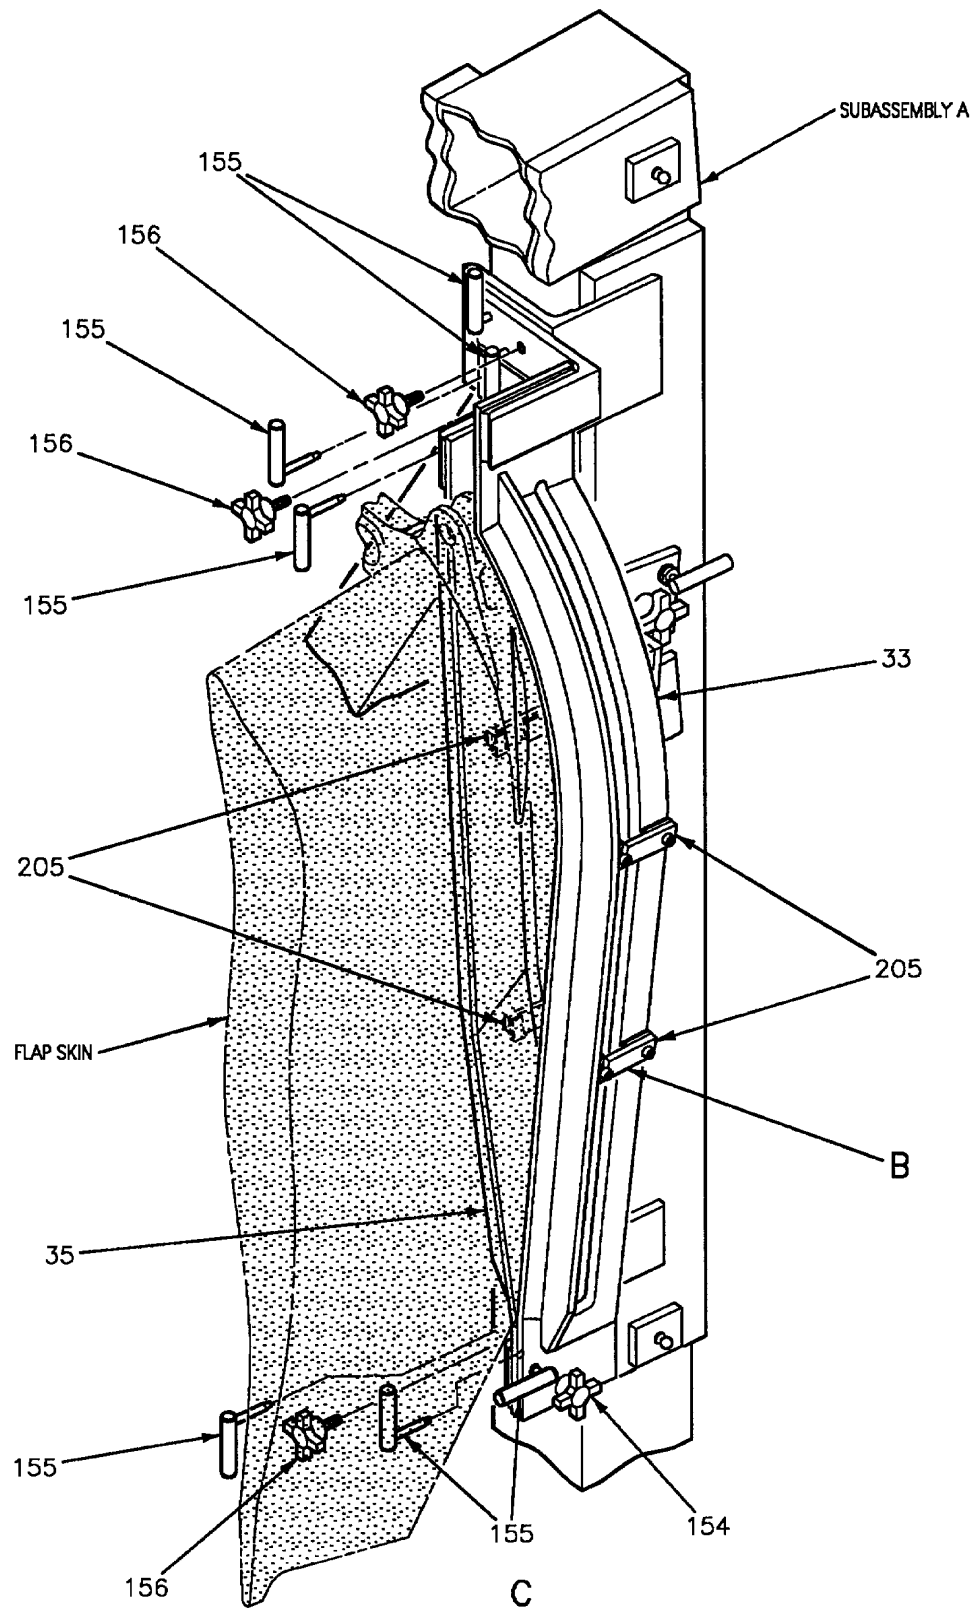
Trimming Upper and Lower Skins (Sheet 3)
